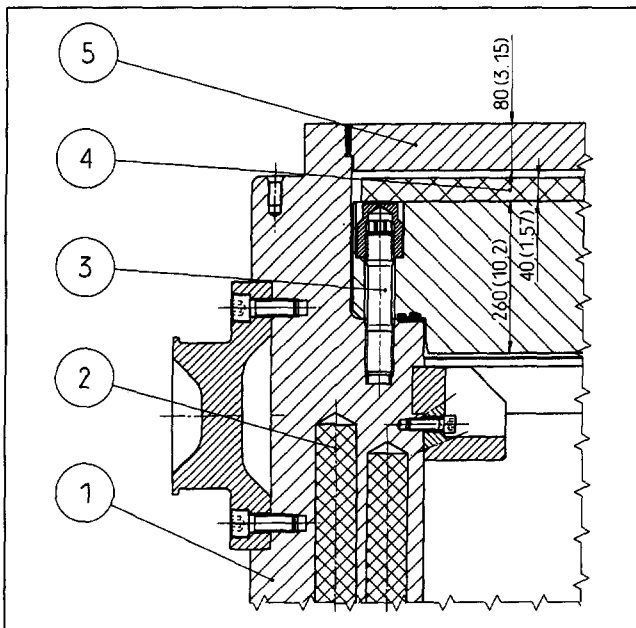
Lid Assembly, Version II Welded Closure (Secondary Lid)
